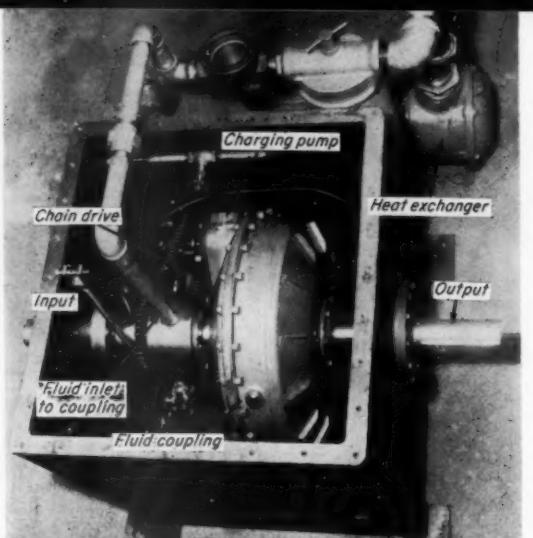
Charging pump of this variable-speed fluid coupling is chain driven from the input shaft. Charging pumps permit 100% filling fluid coupling or torque converter. They also let a heat exchanger be used for additional fluid cooling.
